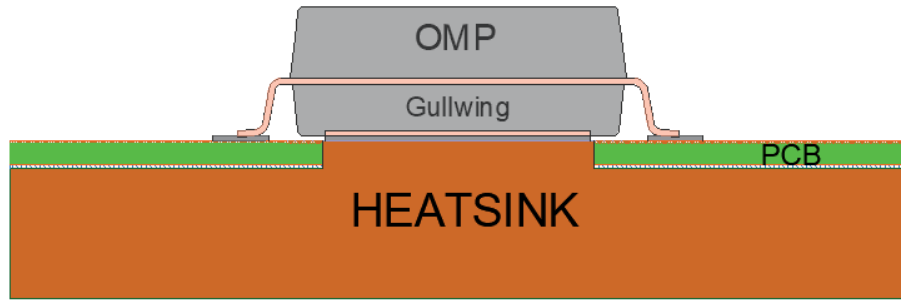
PCB bonded to a heat sink with a pedestal, intended for gullwing high-power packages
